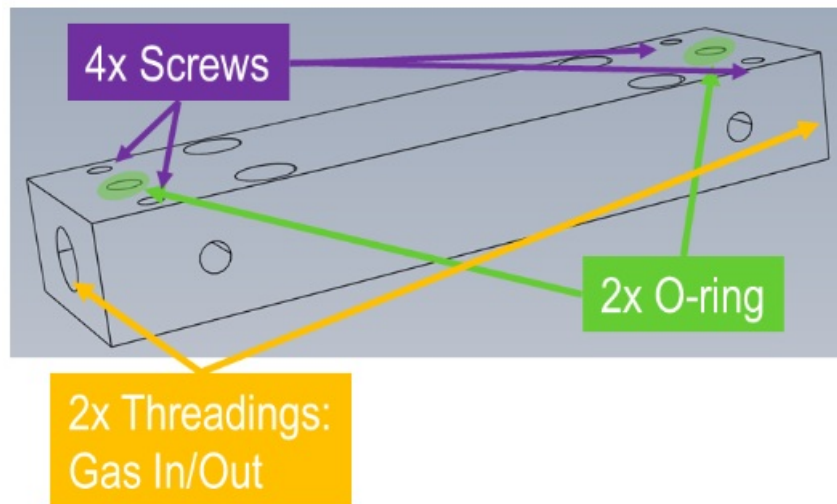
Suggested manifold design for SFC54xx / SFM54xx
